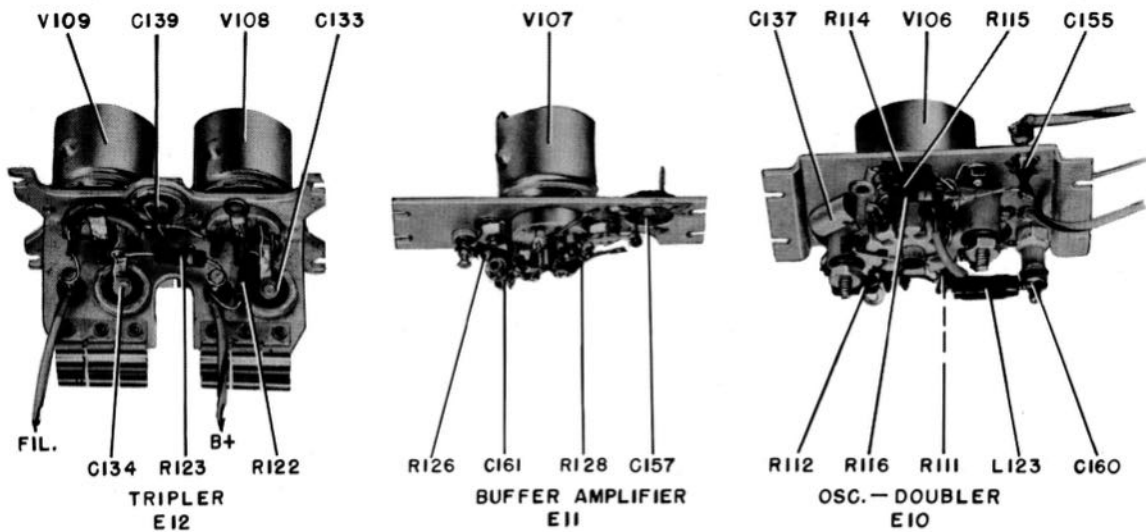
Socket Plate and Shield Assemblies from Oscillator-Multiplier Section of Preselector
